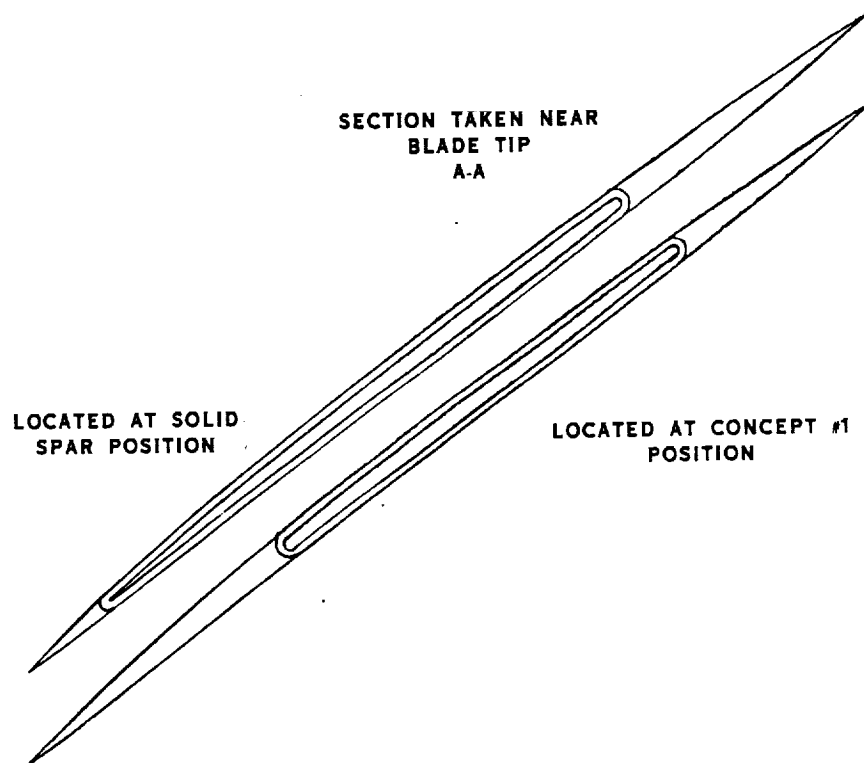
HOLLOW STEEL CROSS SECTION
